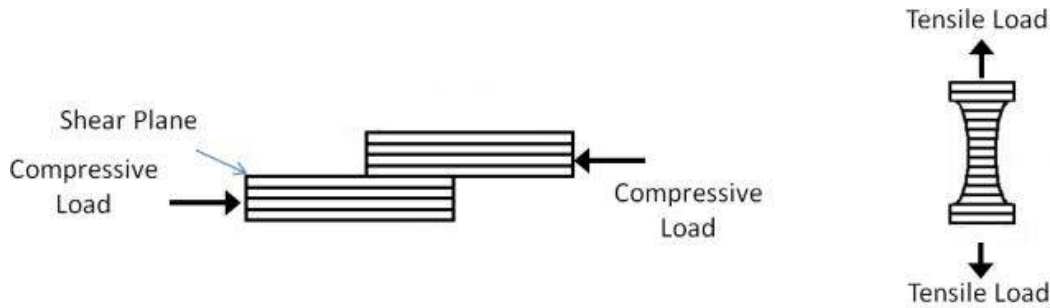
Shear and tensile mechanical testing of UAM welded builds [15].
